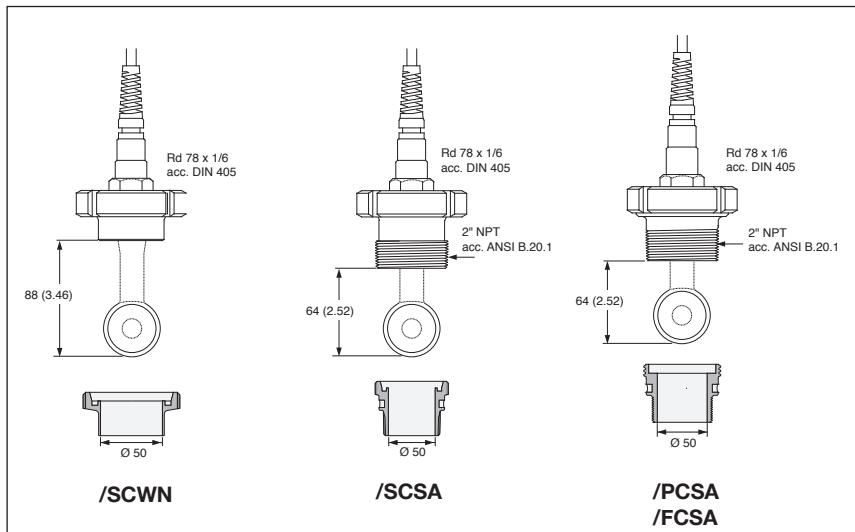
Dimensions ISC40FS with sensor installed (dimensions in mm (inches))
